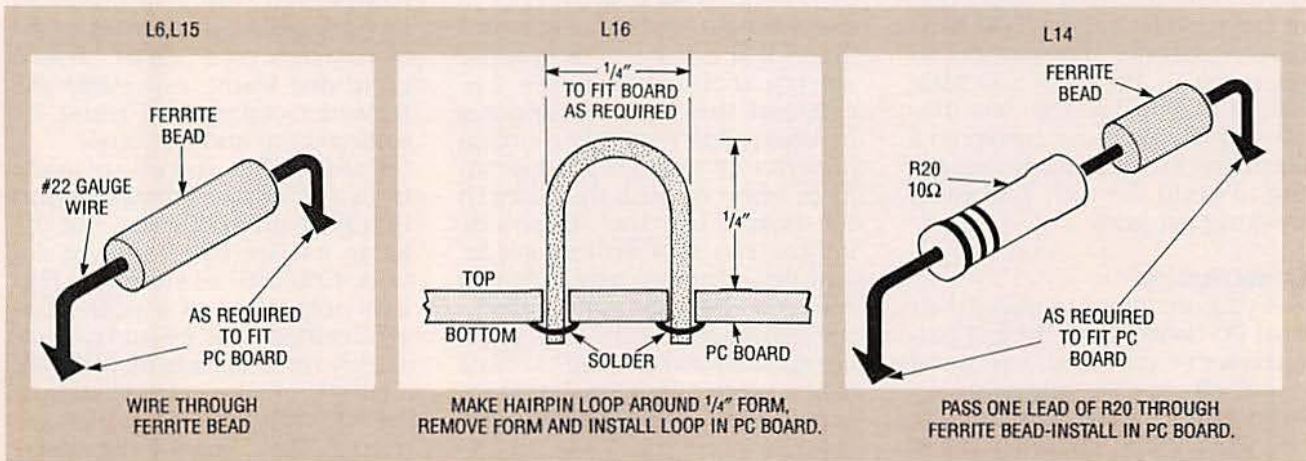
COILS L6 AND L15 are ferrite beads placed over a length of wire, L16 is just a loop of wire, and L14 is a ferrite bead placed over one lead of R20.
